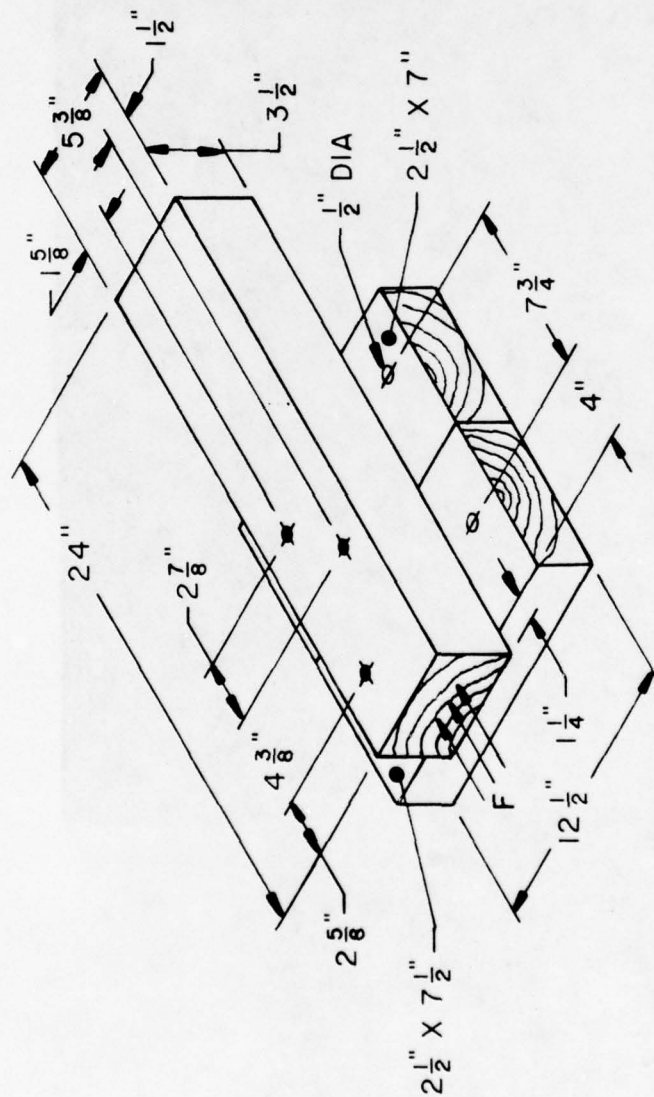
BLOCKING TO FLOOR CONDITIONS
